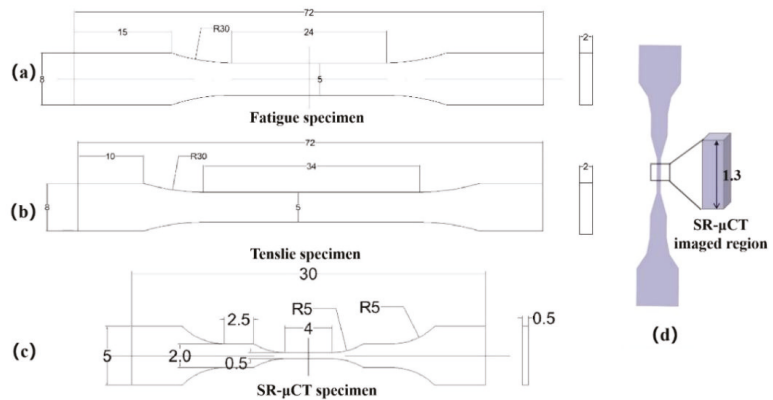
Specimen size: (a) fatigue specimen, (b) tensile specimen, (c) SR- μ CT specimen, (d) synchrotron radiation imaging region (dimensions in mm).
